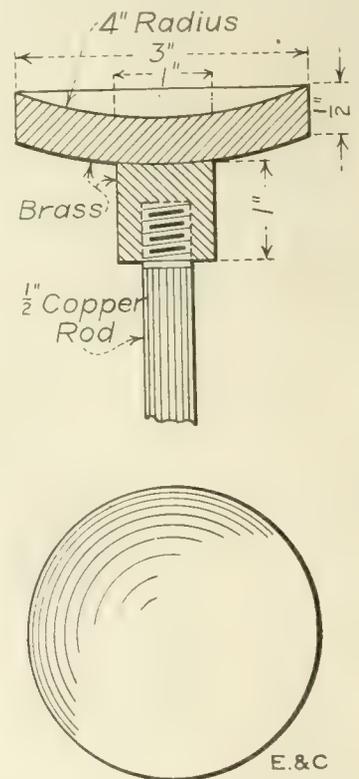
Detail of Splash Plate, Plant at Residence A.
